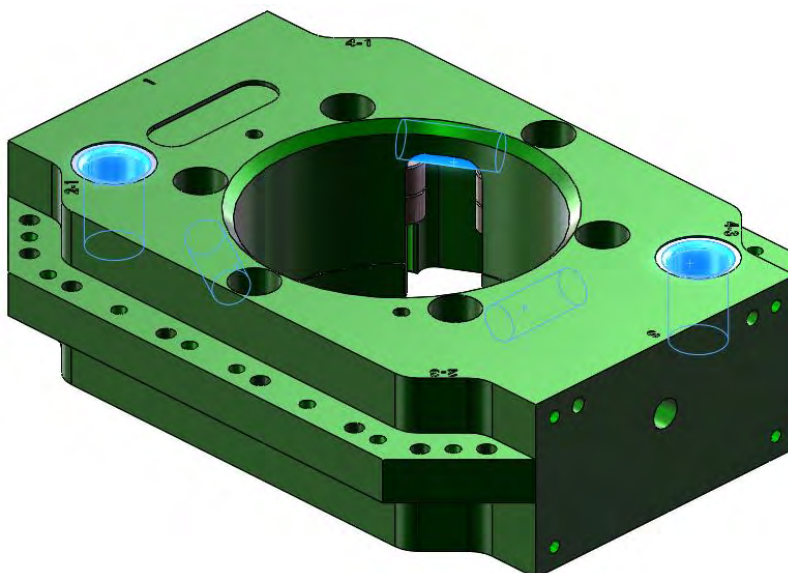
E125 Tool Adaptor Lubrication
